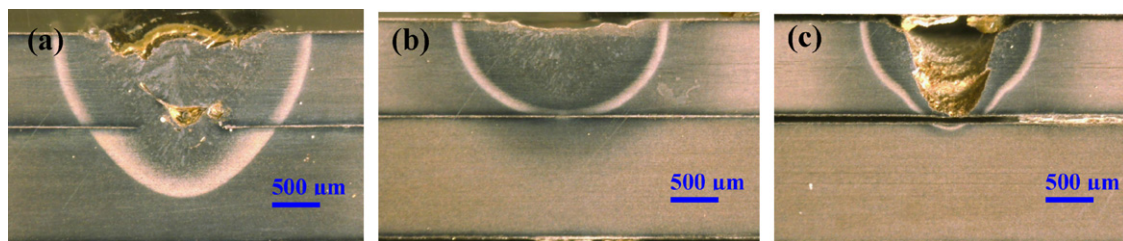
The cross-sectional views of DP980 weld obtained by laser power of 2.5 kW and remained zinc coating at the faying interface (a) $v=30$ mm/s, (b) $v=40$ mm/s, and (c) $v=50$ mm/s.
